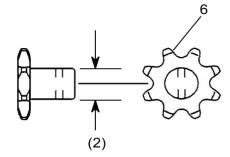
Sheet 6: Aileron Trim Tab Actuator Disassembly/Assembly
